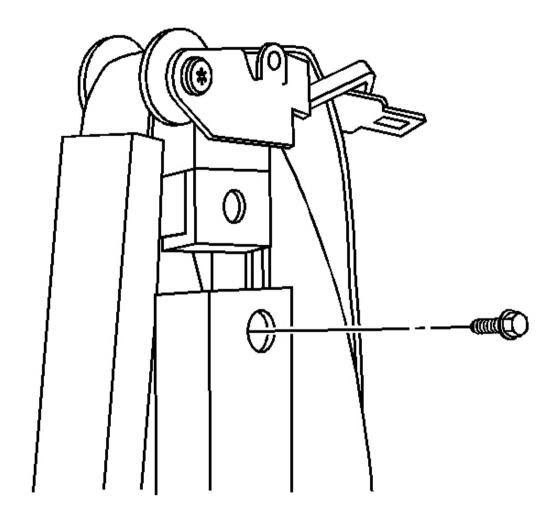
Upper Anchor Bolt - Right Front Courtesy of GENERAL MOTORS CORP.
